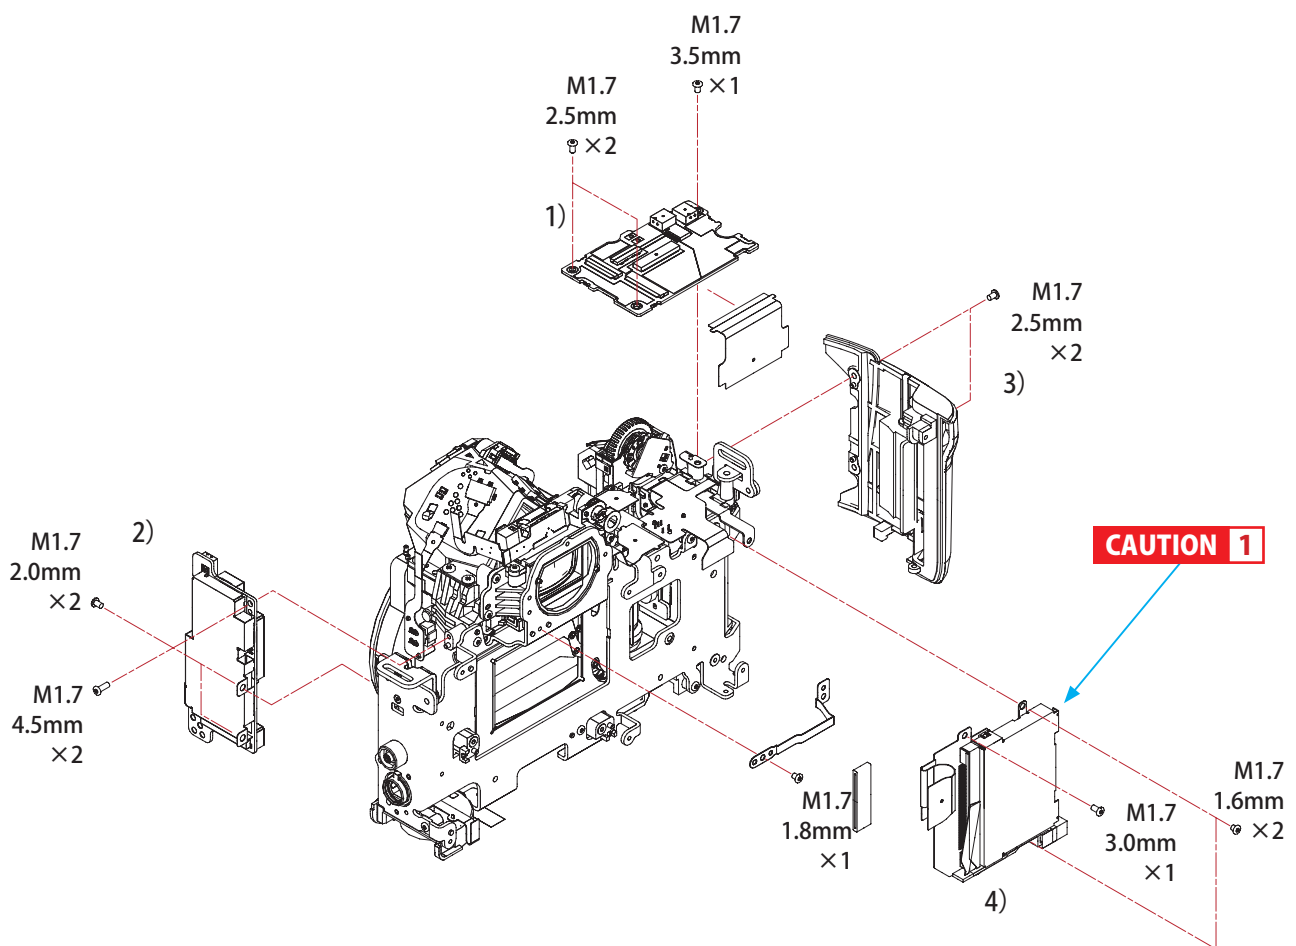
LPU PCB / DC/DC PCB / CF Slot Cover / CF Slot Ass'y Removal
